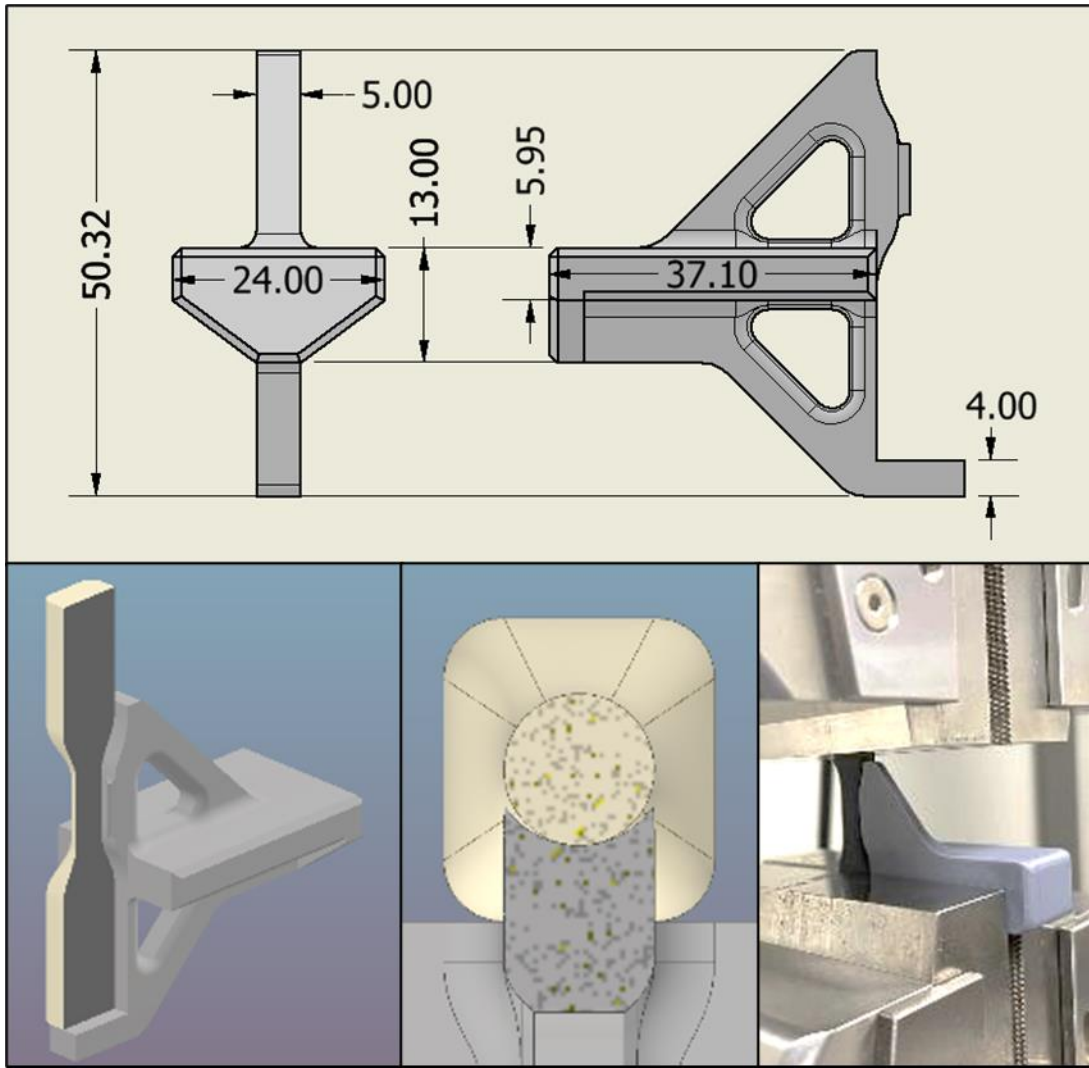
Alignment jig design drawing images with dimensions in mm (top), CAD model with cross-section of ILA dogbone in place (bottom left), top view showing the cylindrical fit of gauge section (bottom center), and jig in place on tensile wedge clamps (bottom right). The jig included in the last image shows the equivalent design produced for the modified Type V specimens.
